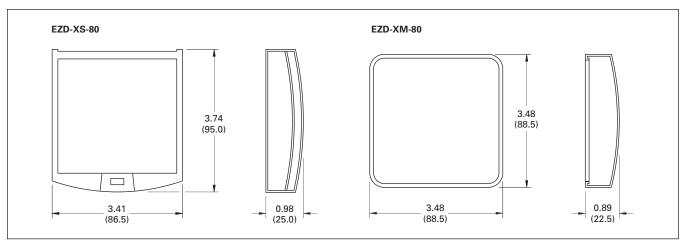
EZD-XS-80 and EZD-XM-80 Series Dimensions in Inches (mm), Drawing Number MD05013009E
